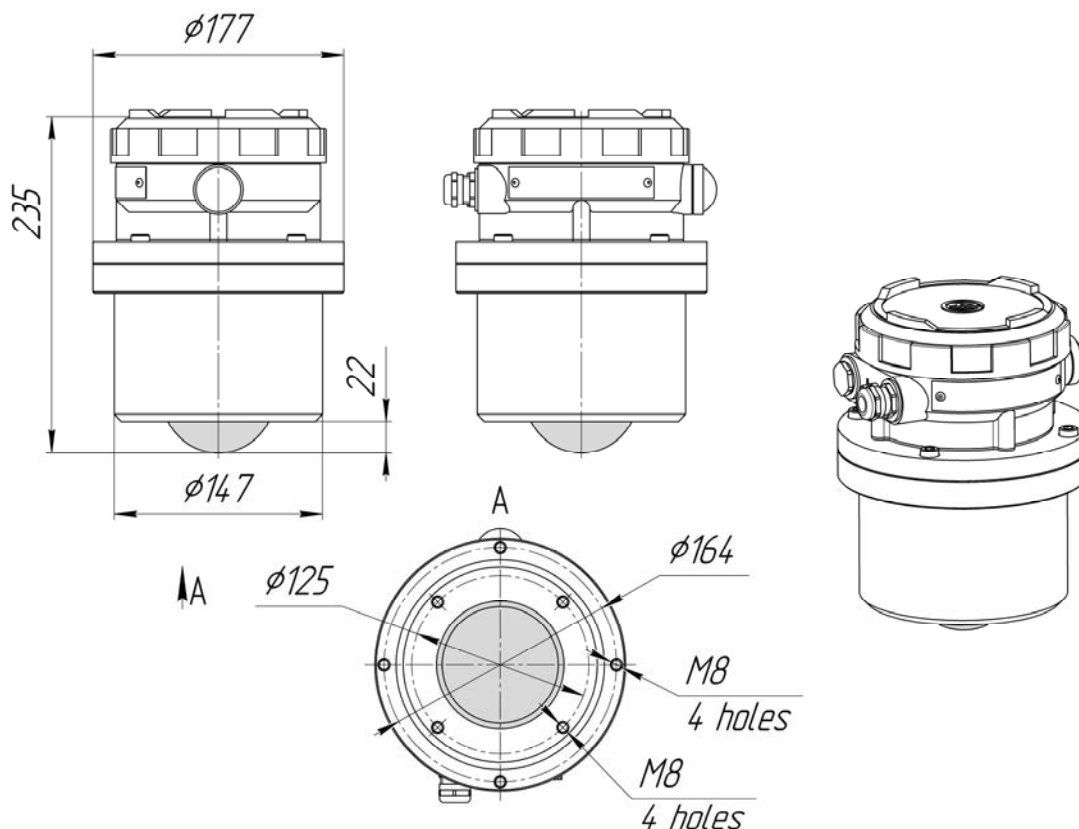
ULM-3D-64 Level transmitter without mounting flanges
